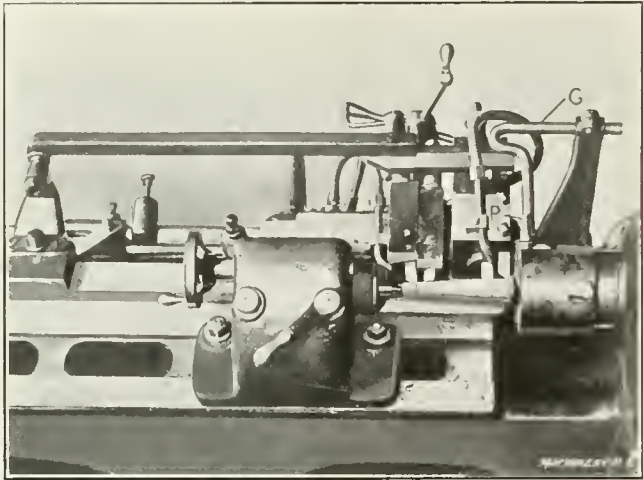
Lo-swing Lathe set up for Turning a Steering Knuckle
